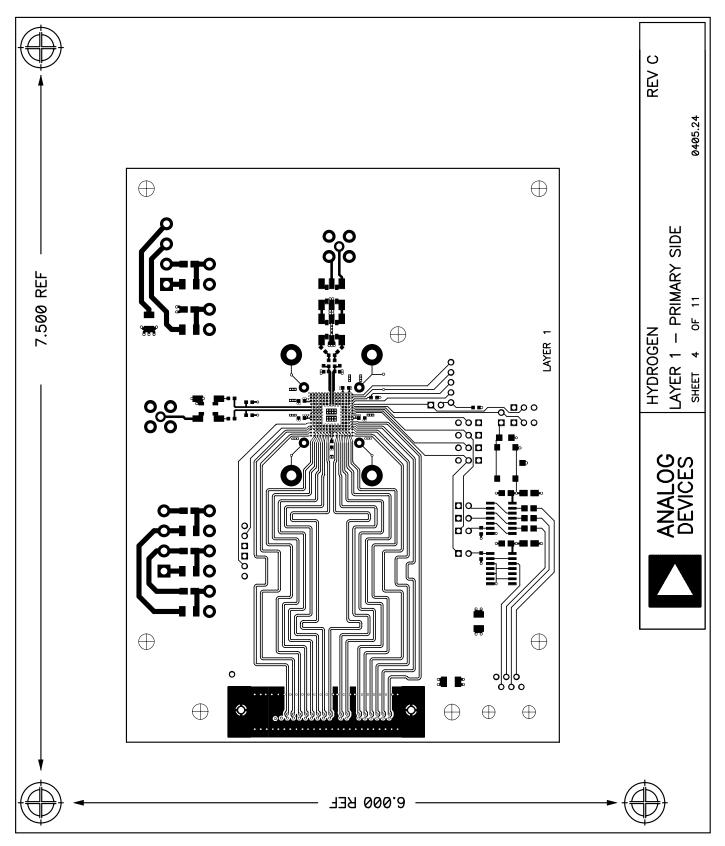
PCB Layout Layer 1, AD9736 Evaluation Board, Rev C
